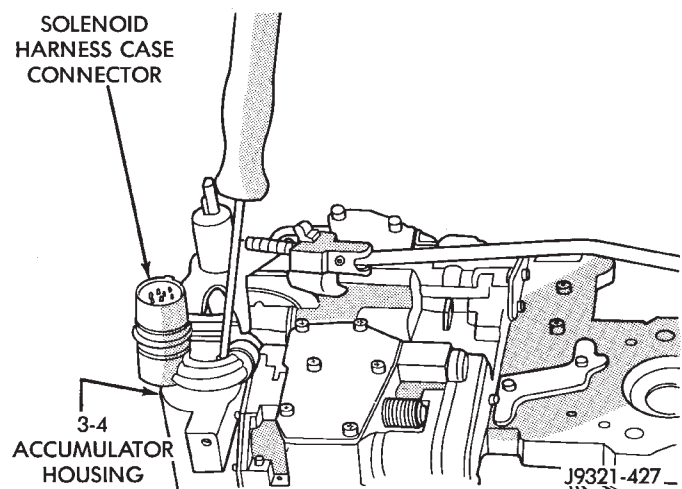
Solenoid Harness Case Connector Shoulder Bolt
